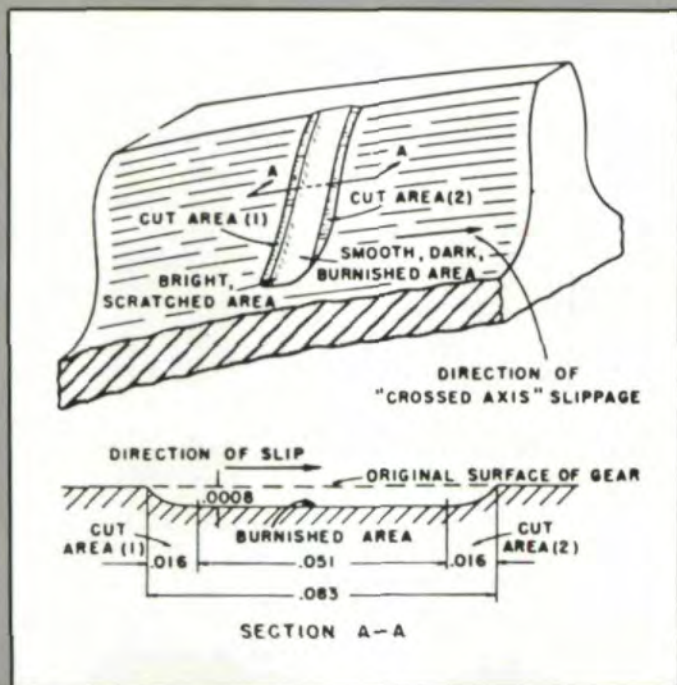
Gear shaving is a combination of both cutting and burnishing.
